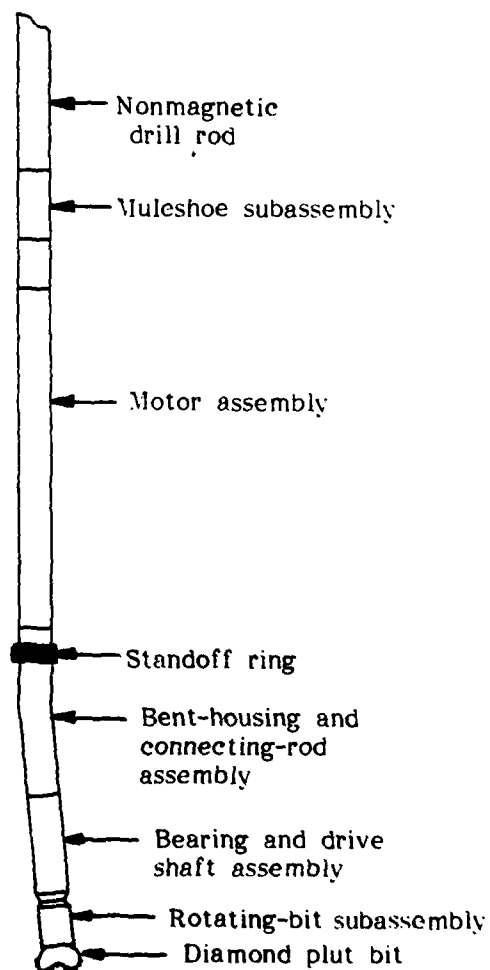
Dyna-Drill Tool Assembly Showing Bent-Housing and Standoff Ring (Diamond et al., 1977)
